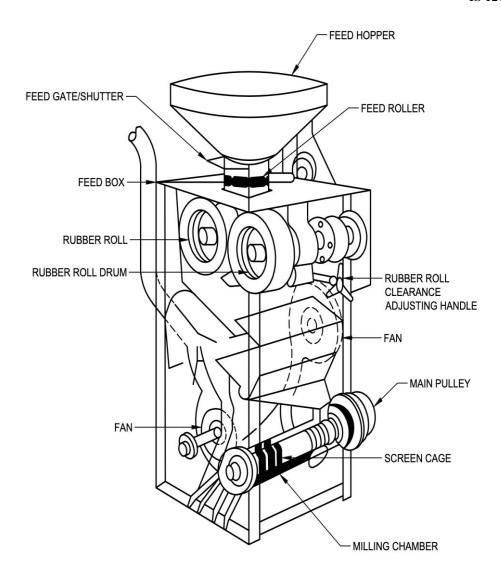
A TYPICAL MINI RICE MILL WITH RUBBER ROLL DEHUSKER
